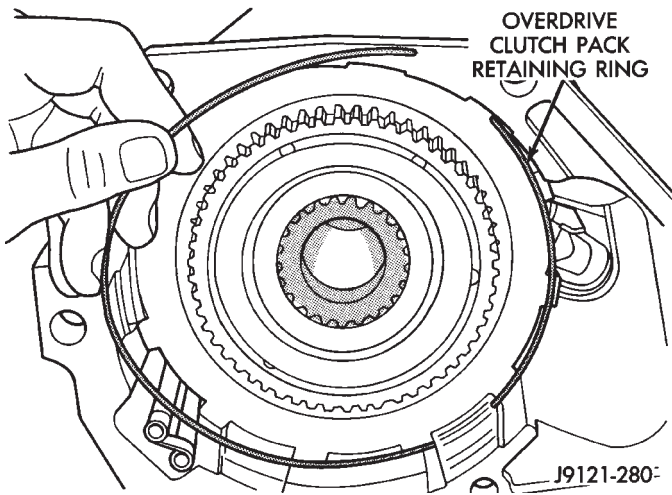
Overdrive Clutch Pack Retaining Ring Removal
